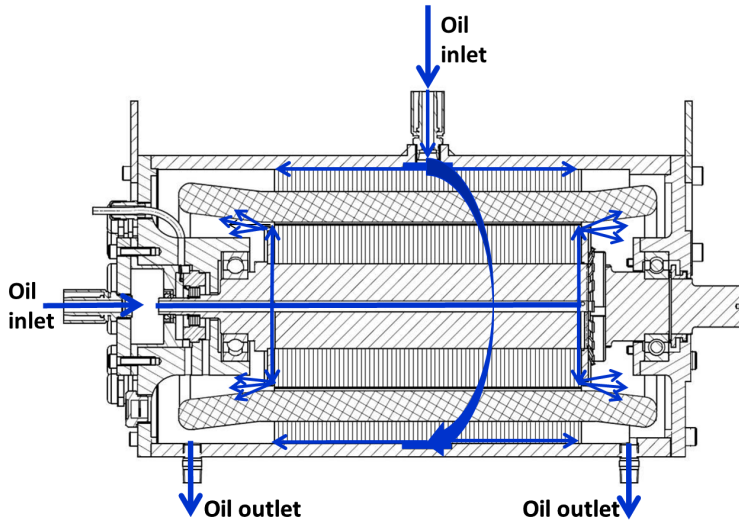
Principle sketch of the two oil circuits used to cool the prototype machine
